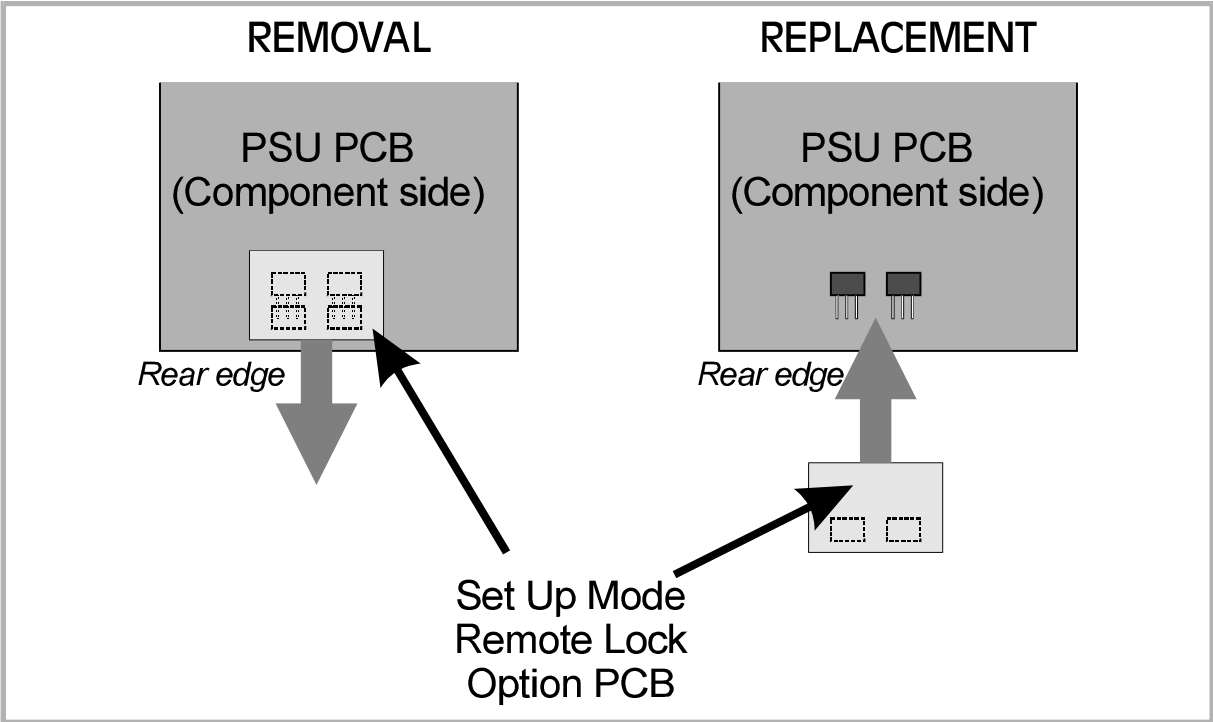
Removing/Replacing the Set Up Mode Remote Lock Option PCB
